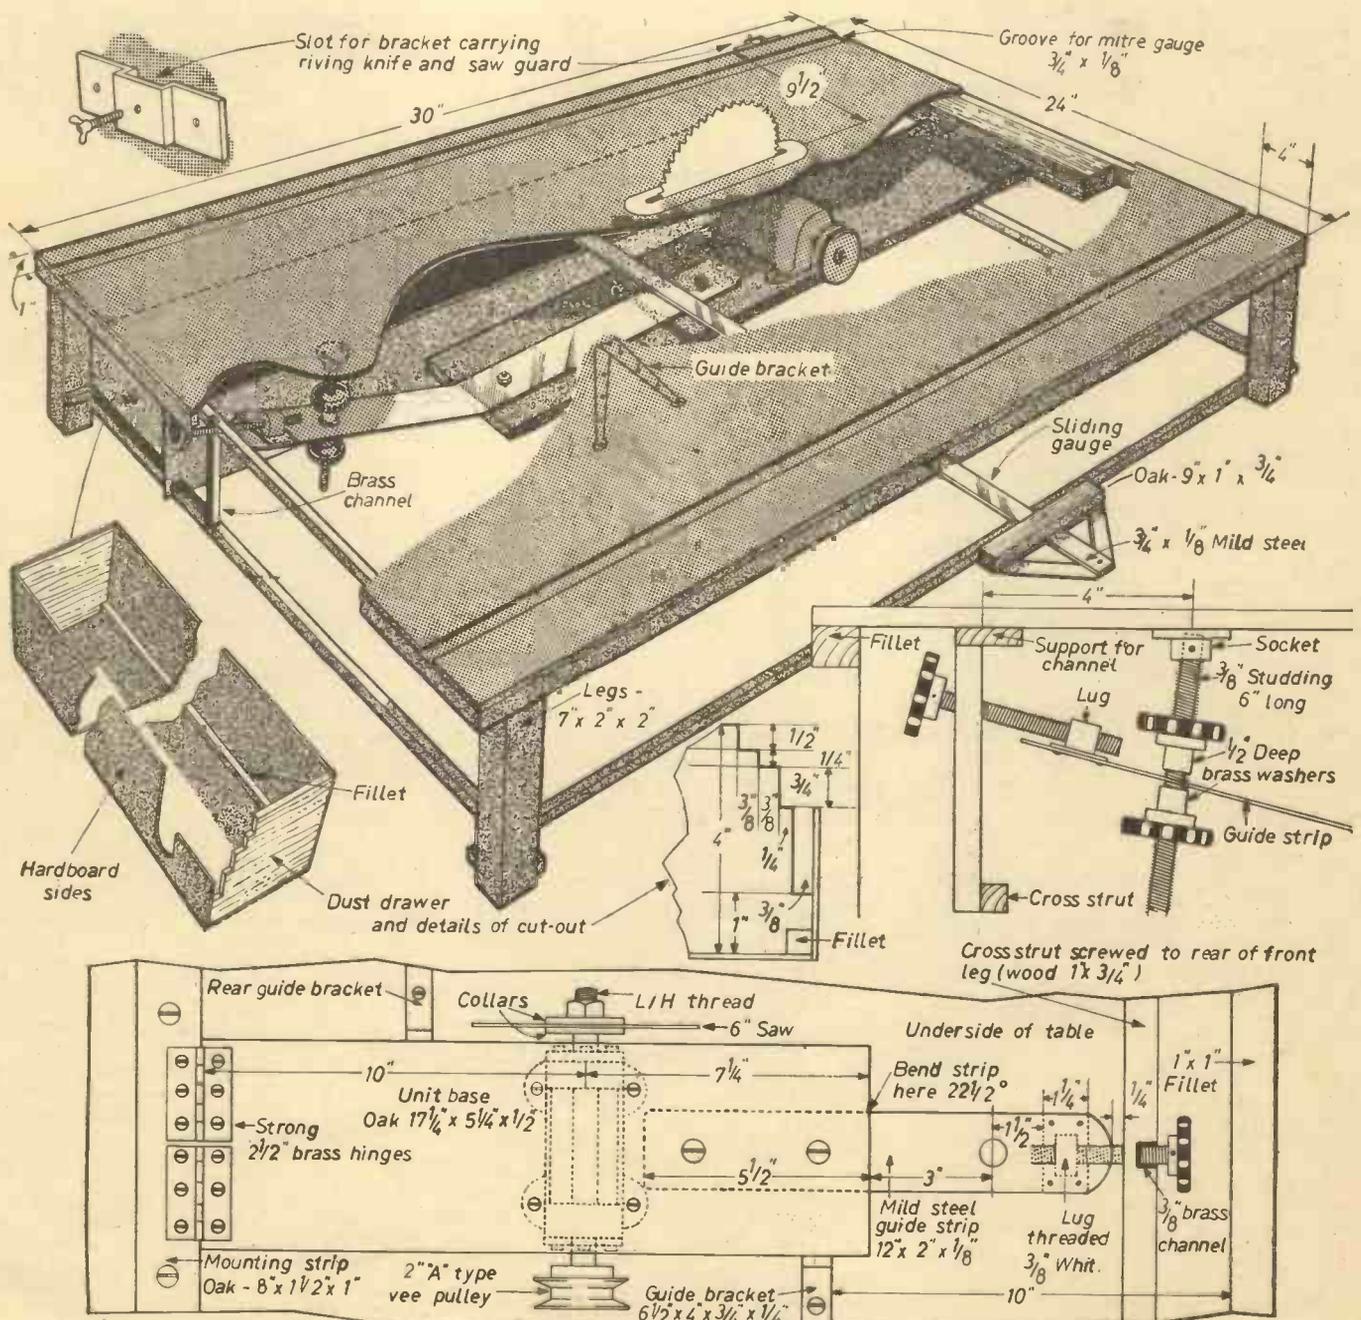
General arrangement and plan views of the saw table and insets showing sawdust drawer and adjustment controls.
